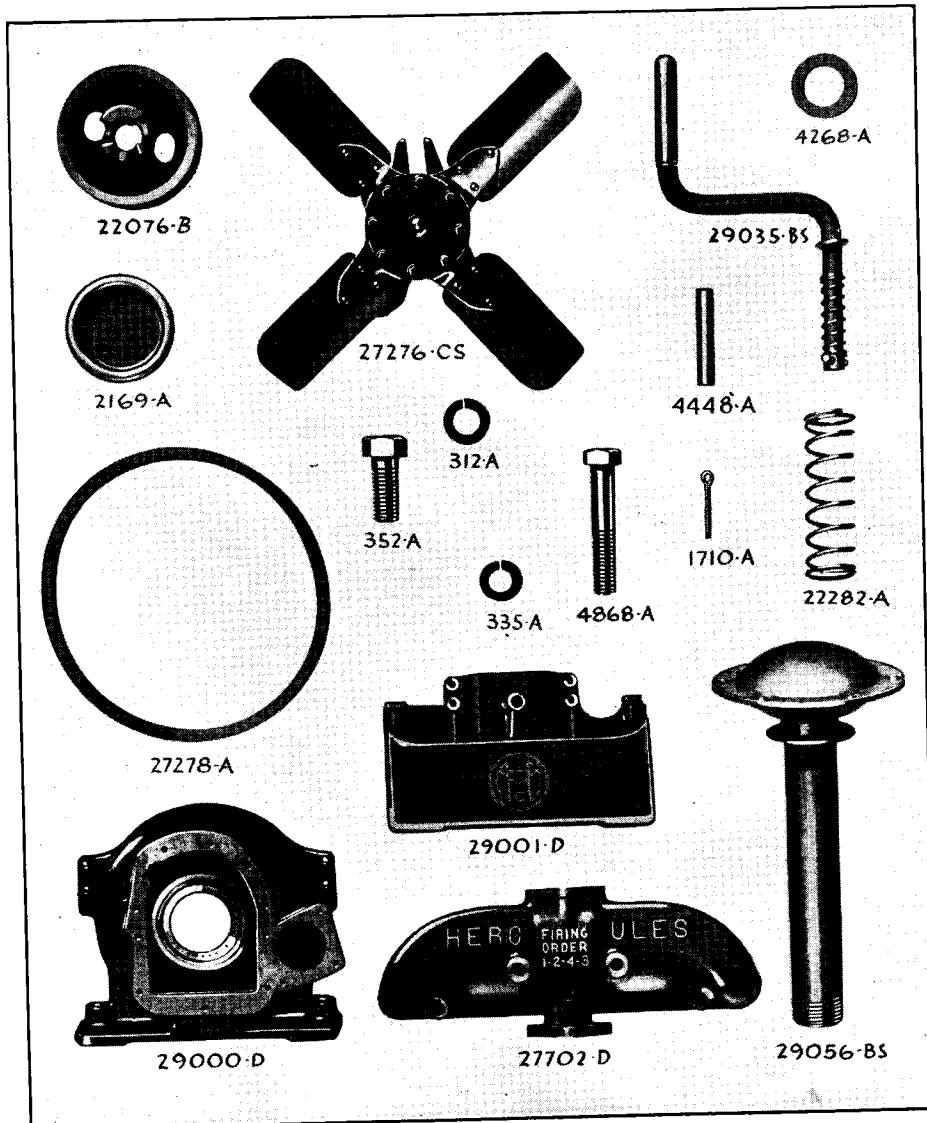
Fan, Front support, Bellhousing and Muffler
